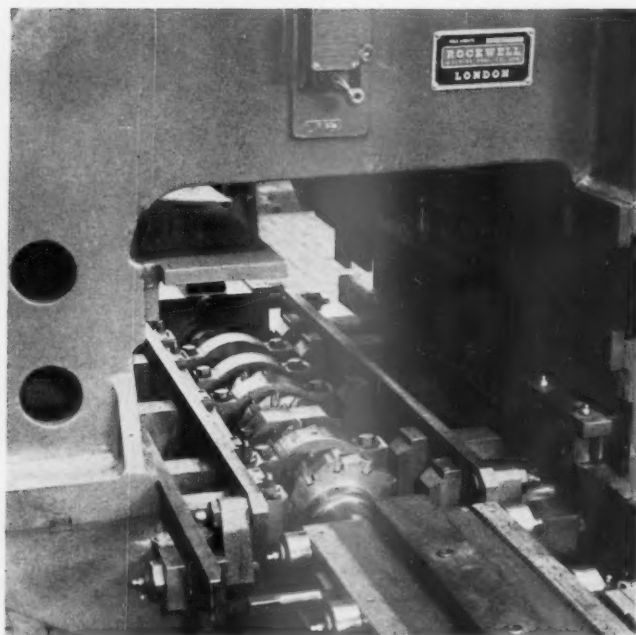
Tooling for machining bearing widths and milling oil-hole grooves on a Sundstrand milling machine with a rise-and-fall head
